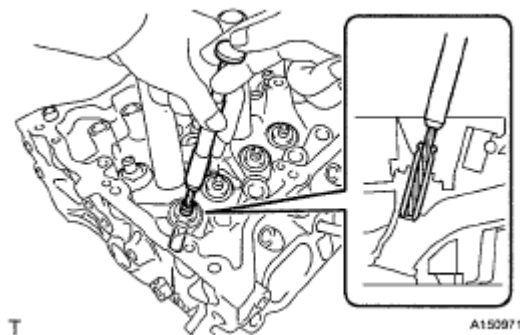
Identifying Standard Clearance Between Guide Bush And Valve Stem
